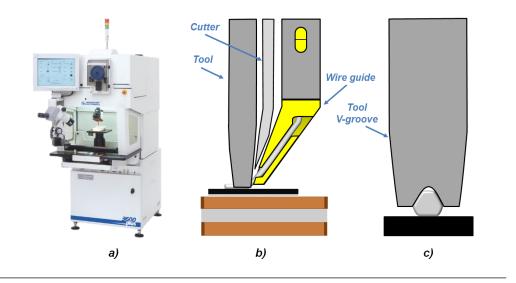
U/S bonding equipment - (a) Wire bonder machine utilized and description of (b) bonder head "lateral view" and (c) tool "front view".
